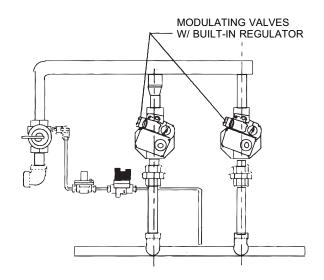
Mechanical Modulating Valve Location (sizes 0724-1336 shown)
